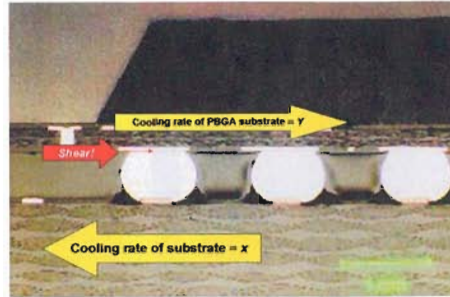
Cross section of BGA revealing shearing zone, caused by CTE mismatch during cooling
